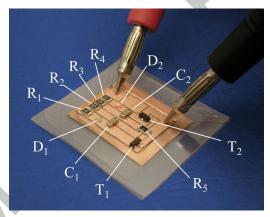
Electronic circuit board fabricated by ultrasonic hot embossing [58].
